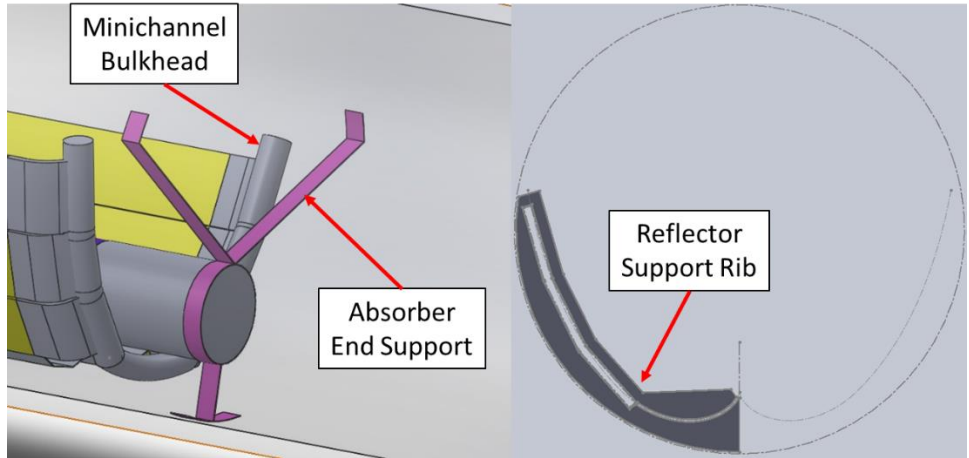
Glass tube end cap, clamp, and supporting structure.
